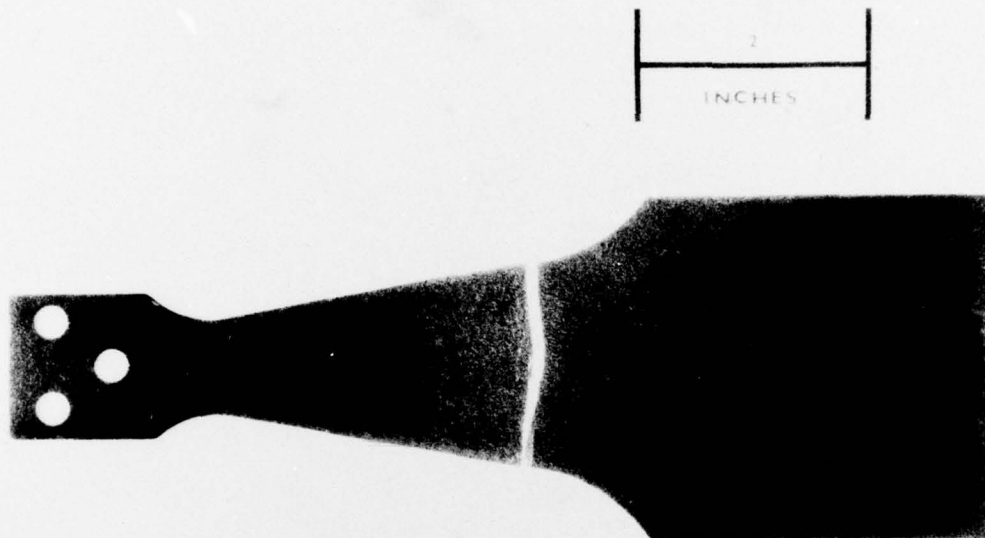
Mill finished fatigue specimen, from Series 2a and 2b, showing more than one crack initiating.
